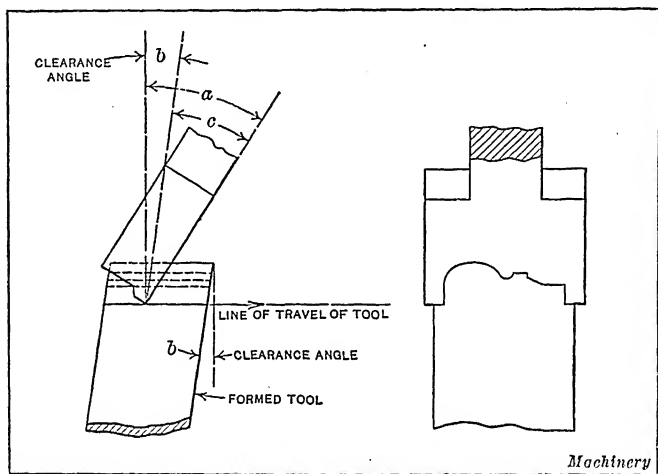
Relative Positions of Shaper Tool and Formed Tool
